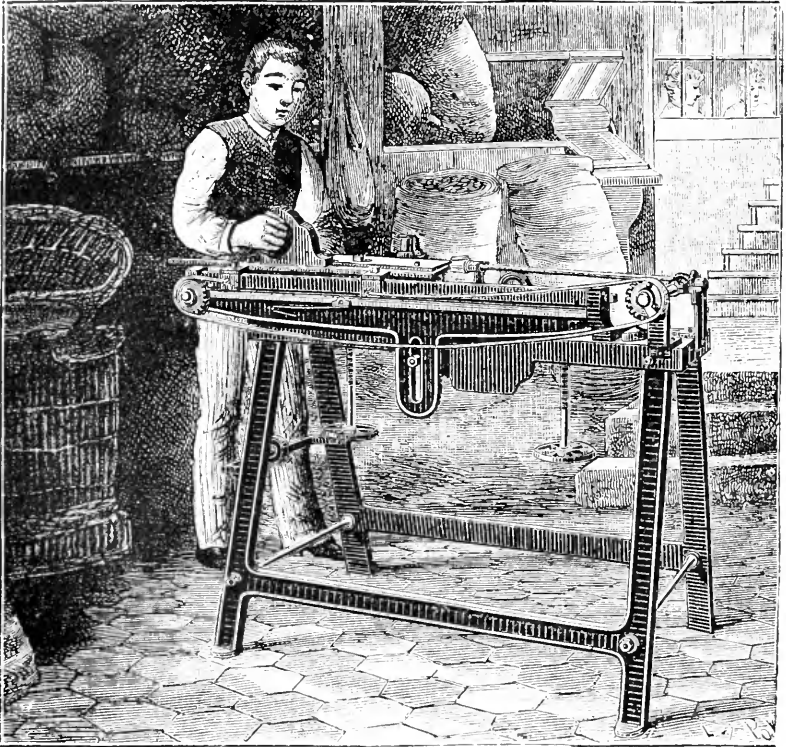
MACHINE FOR TRIMMING CORKS.
